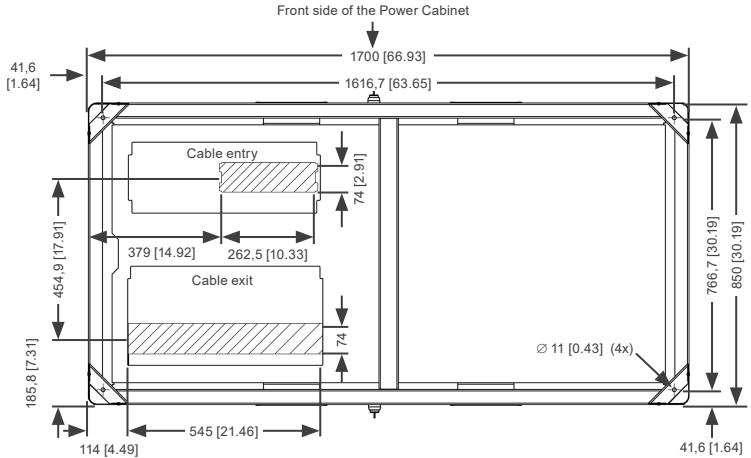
Mounting and cable routing dimensions for the Power Cabinet – mm [in]
